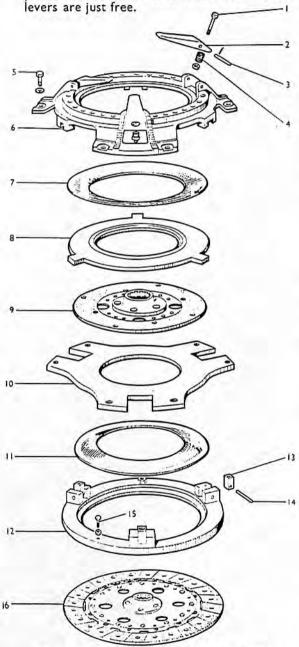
EXPLODED VIEW OF DUAL CLUTCH
